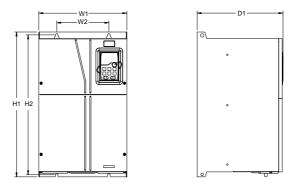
Wall-mounting drawing for the 380V 0110-0132 models
